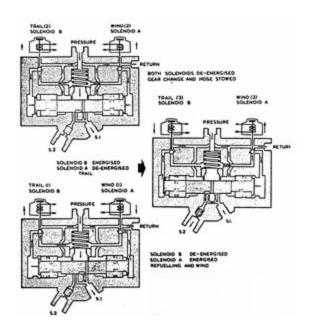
Mk 20 hose-drum-unit drive-motor control valve
